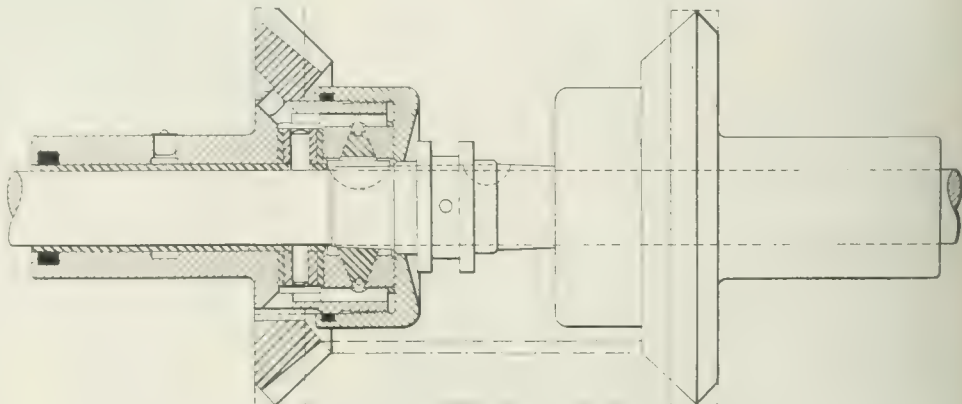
An Application of the Clutch to a Geared Head Machine.
